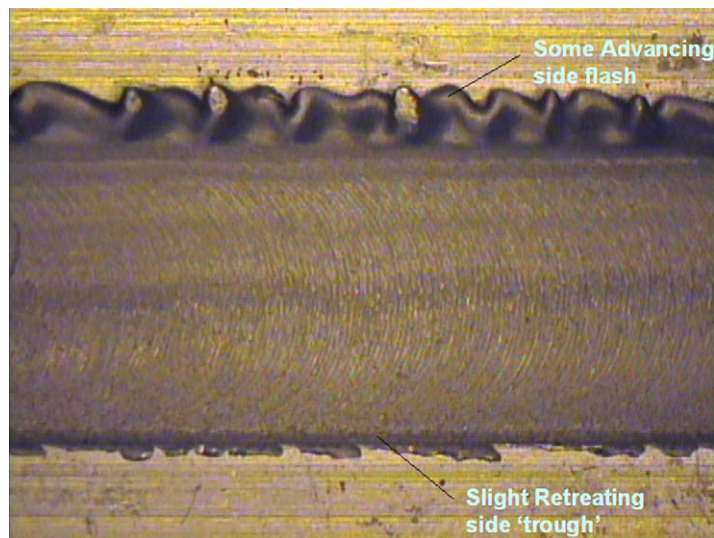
Typical surface appearance for 90° conical tool welds on 1/8 in. thick butted 6061 alloy aluminum plates. Typical conical surface defects are pointed out.
